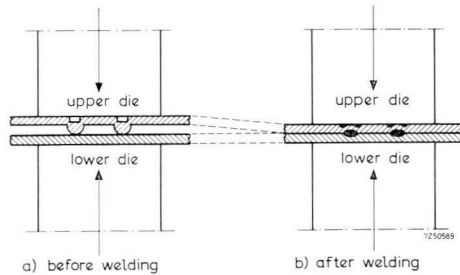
(a), (b). Principle of projection welding.
